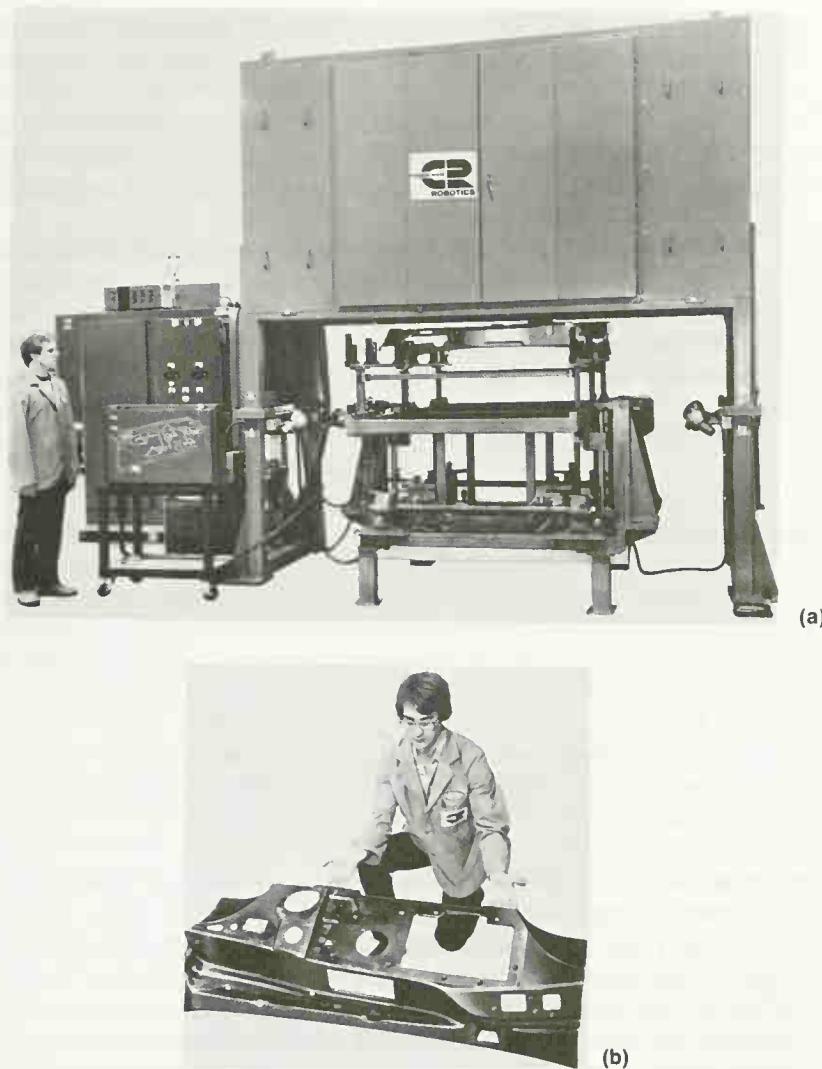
(a) Copperweld's Opto-Sense® vision inspection system used to check automotive instrument panels. (b) Automotive instrument panel checked by Copperweld's Opto-Sense®, (Courtesy of Vuebotics Corporation.)
